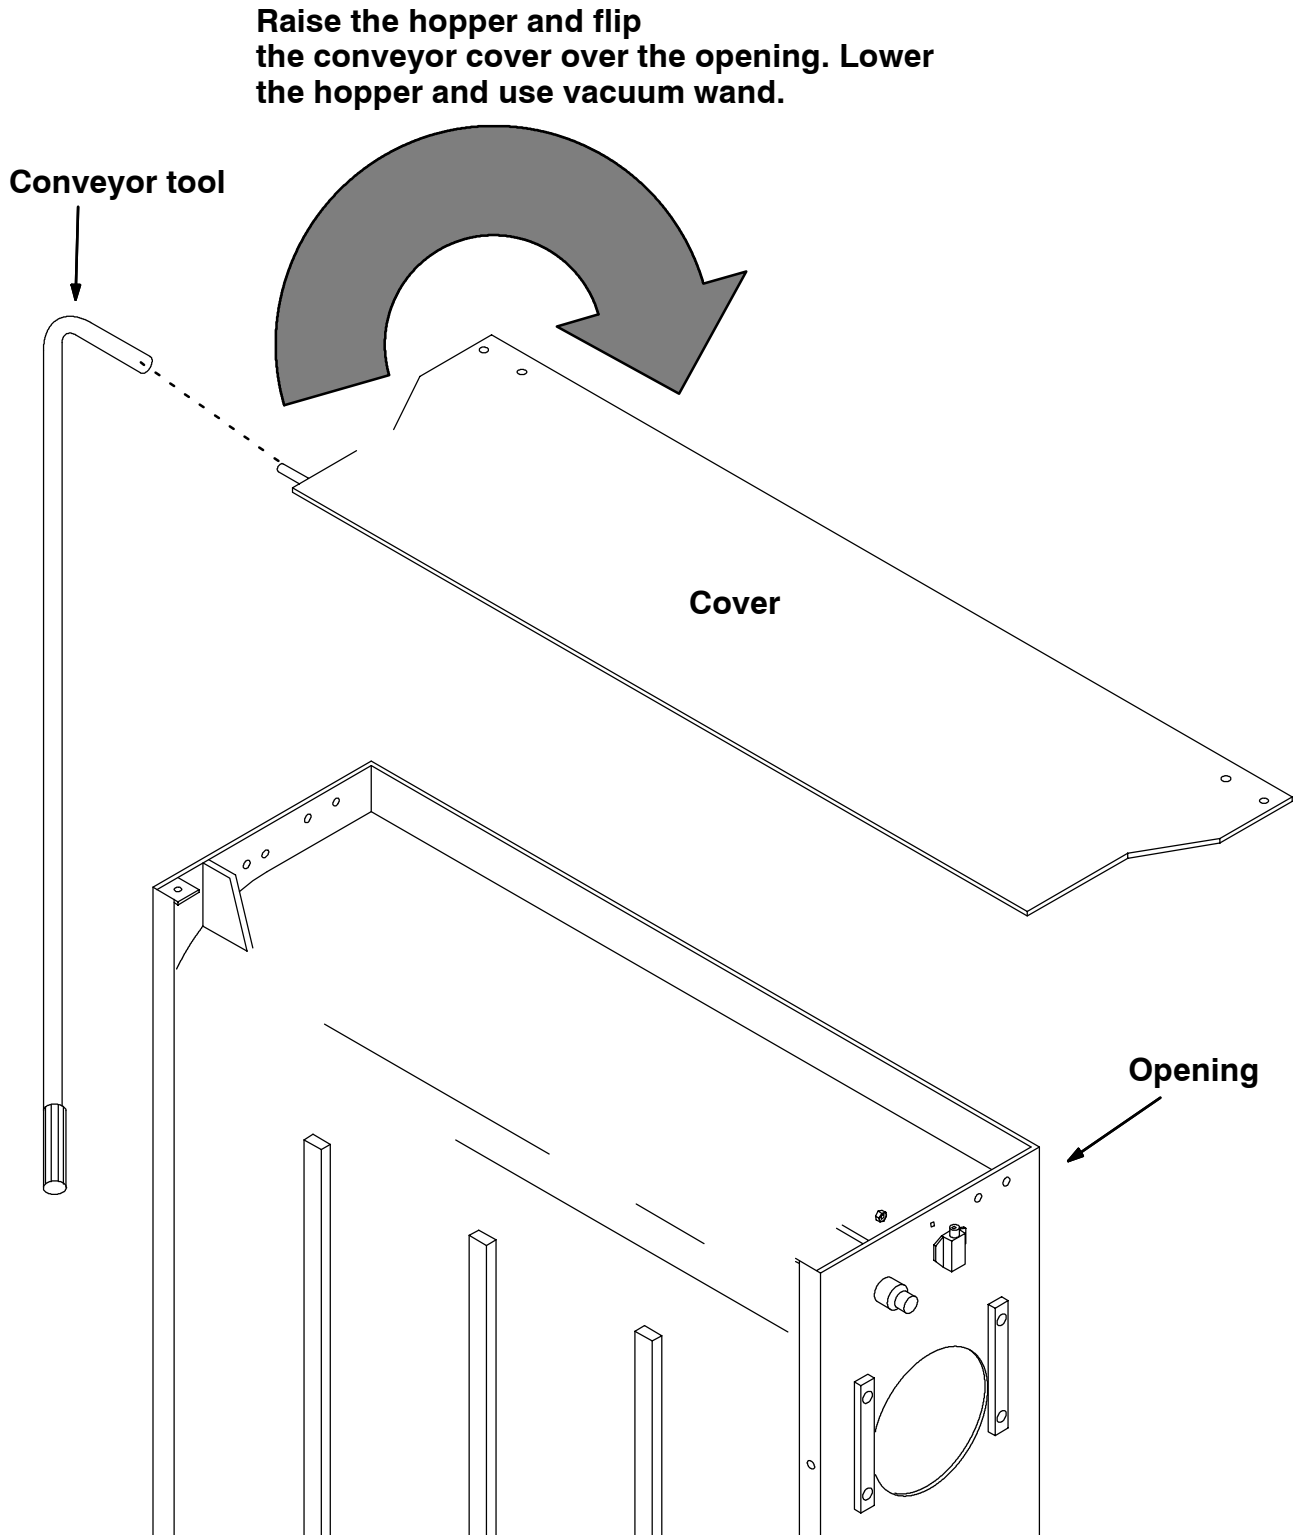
Flip The Conveyor Door To Operate Vacuum Wand
